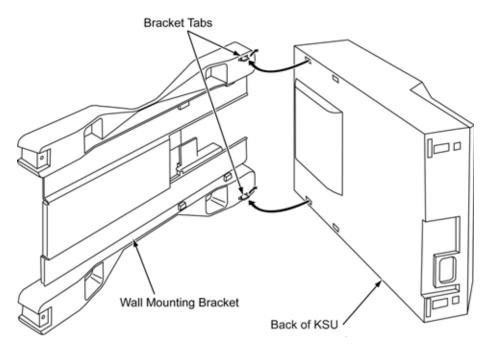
Attach 9.5" Chassis to Wall Mounting Bracket
